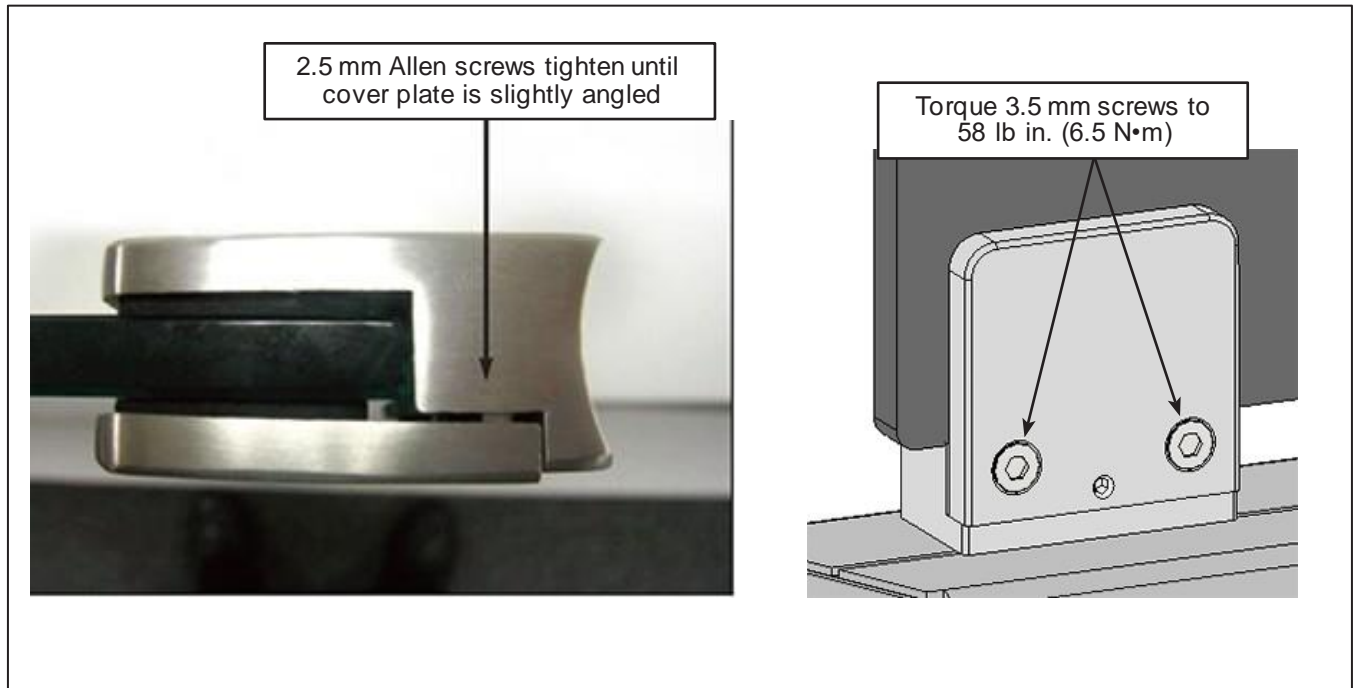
Clamp Reassembly and 3.5 mm Screws Torque
